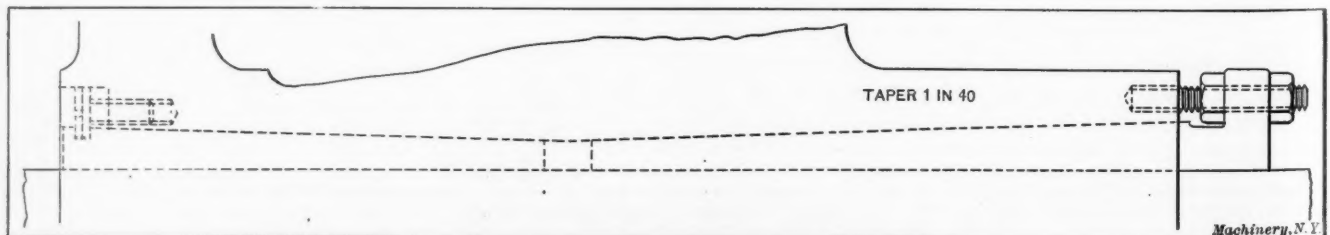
Arrangement of Gibs on a Multiple-spindle Drilling Machine
